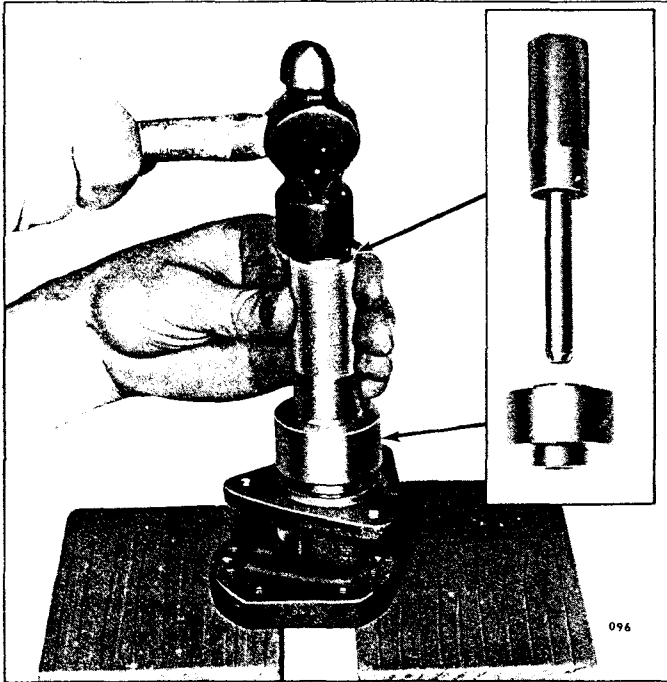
Installing Outer Oil Seal Using Tools J 1508-8 and J 1508-9
